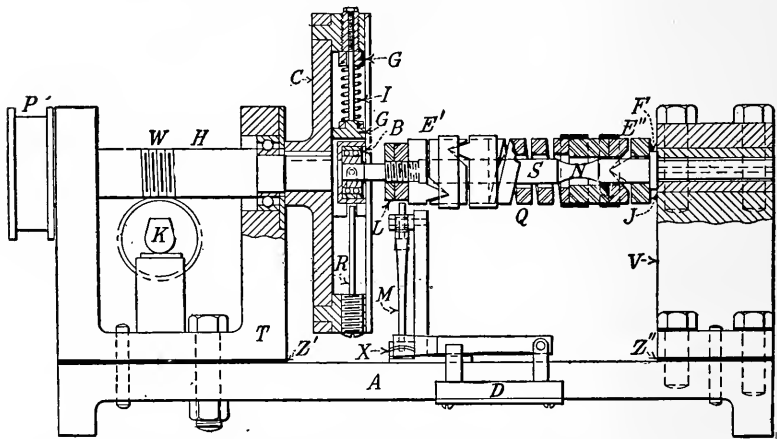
Diagram of testing machine for combined reversed flexure and steady tension. (H. F. Moore.)
